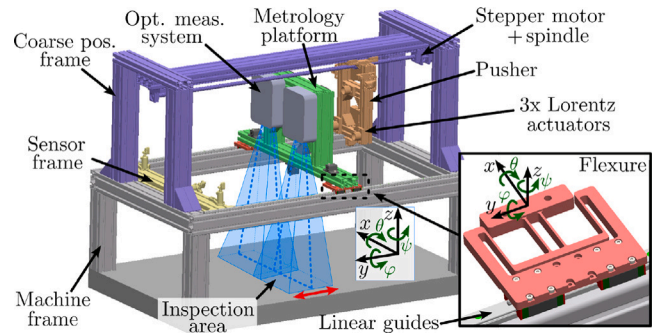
General system design: The metrology platform, which holds the optical measurement systems, is guided with flexure mounts on linear roller guides. The pusher connected to the mechanical spindle-drive controls the platform position in 3DoFs.
